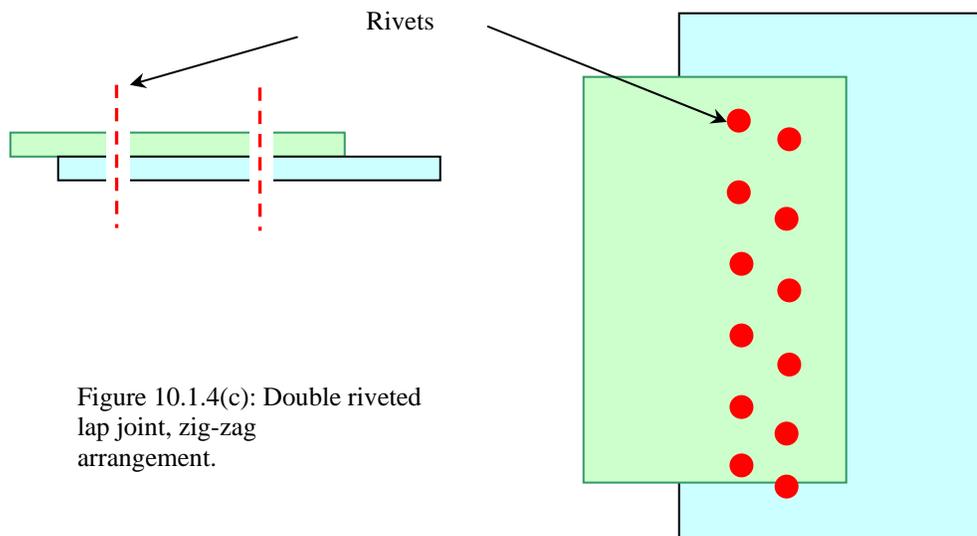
(c): Double riveted lap joint, zig-zag arrangement.
